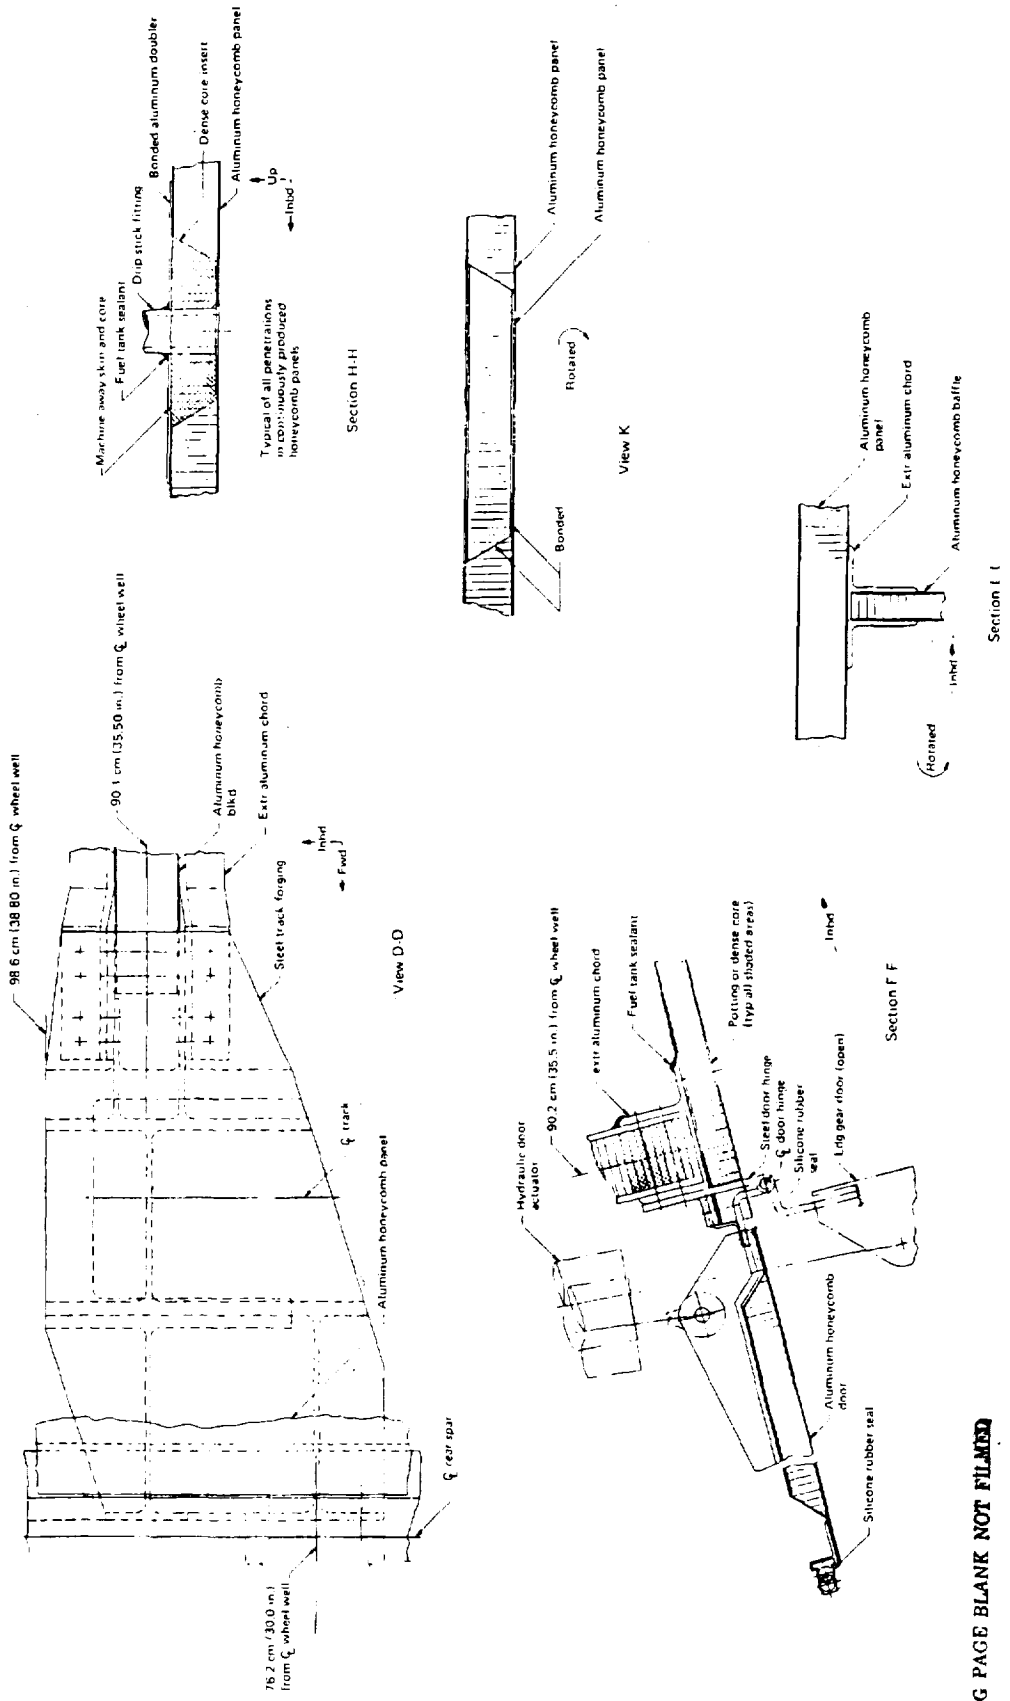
Trailing Edge Box Installation (Sheet 1)
